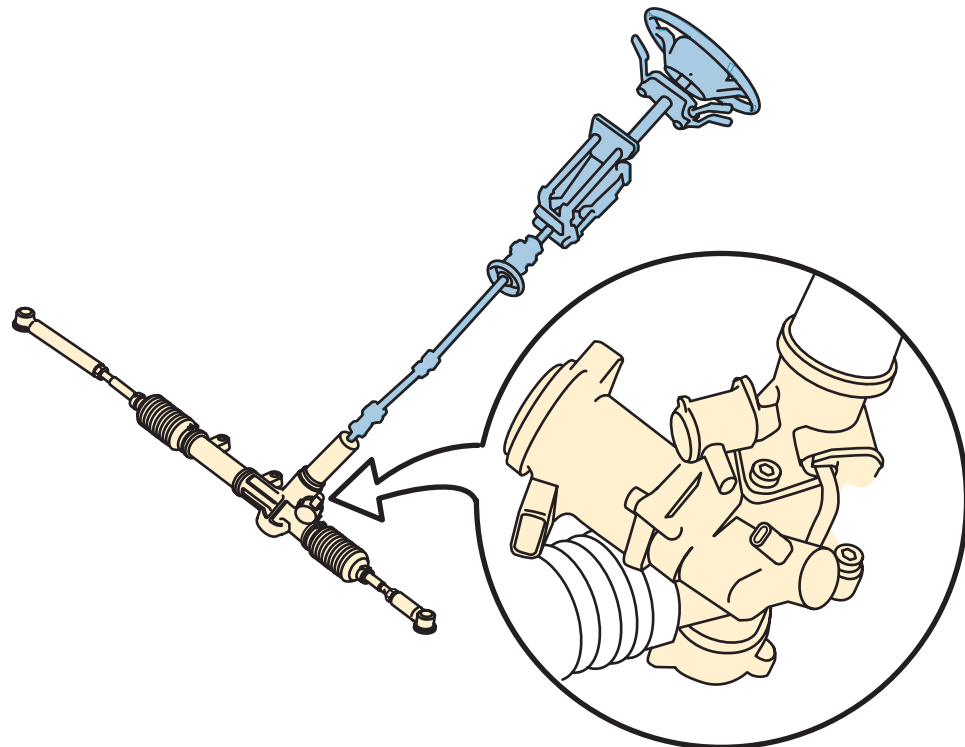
Pinion-drive electronic power steering (EPS) steering gear.
